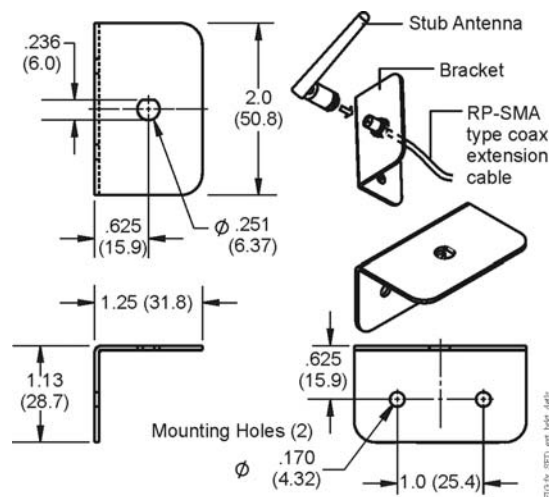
Antenna Extension Option Dimensions, in. (mm)
